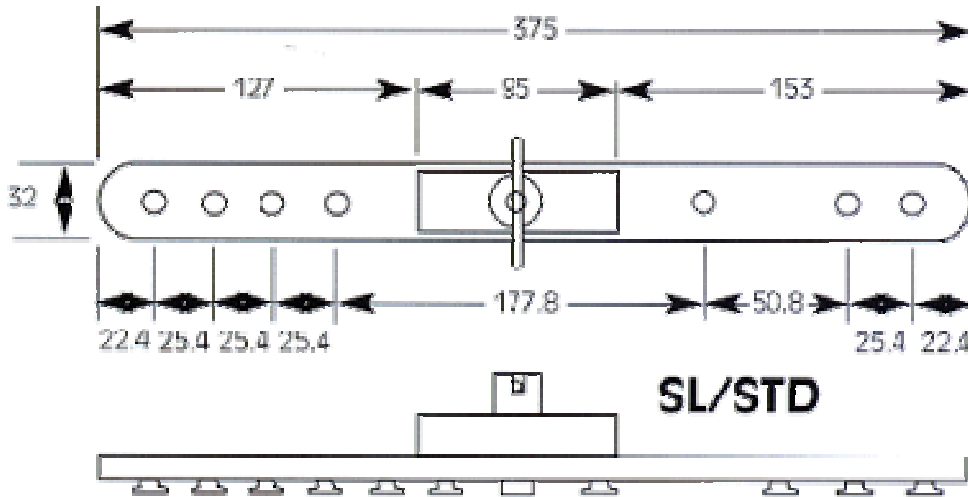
Unwin Anti-Rattle Lockable Seat Fixture
